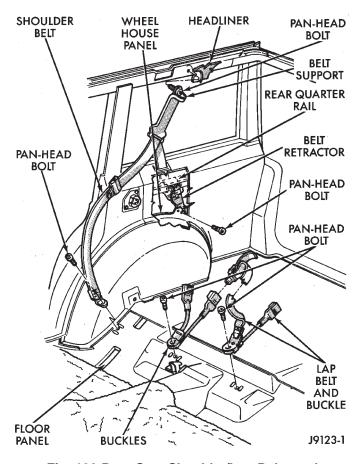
Rear Seat Shoulder/Lap Belts and Buckles—XJ Vehicles
